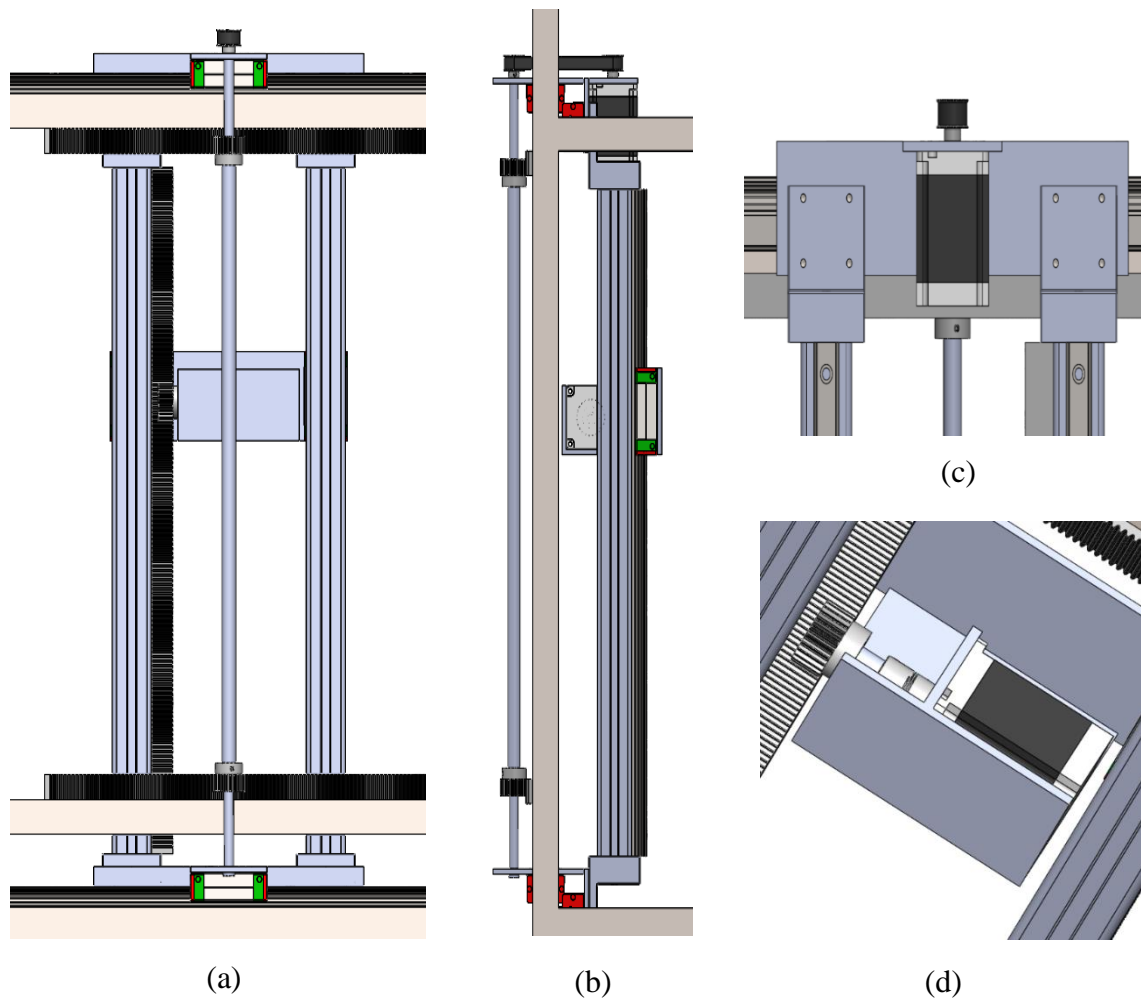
Proposed Design Motor Location, (a) Front View, (b) Side View, (c) X-Axis Motor Position and (d) Y-Axis Motor Position
